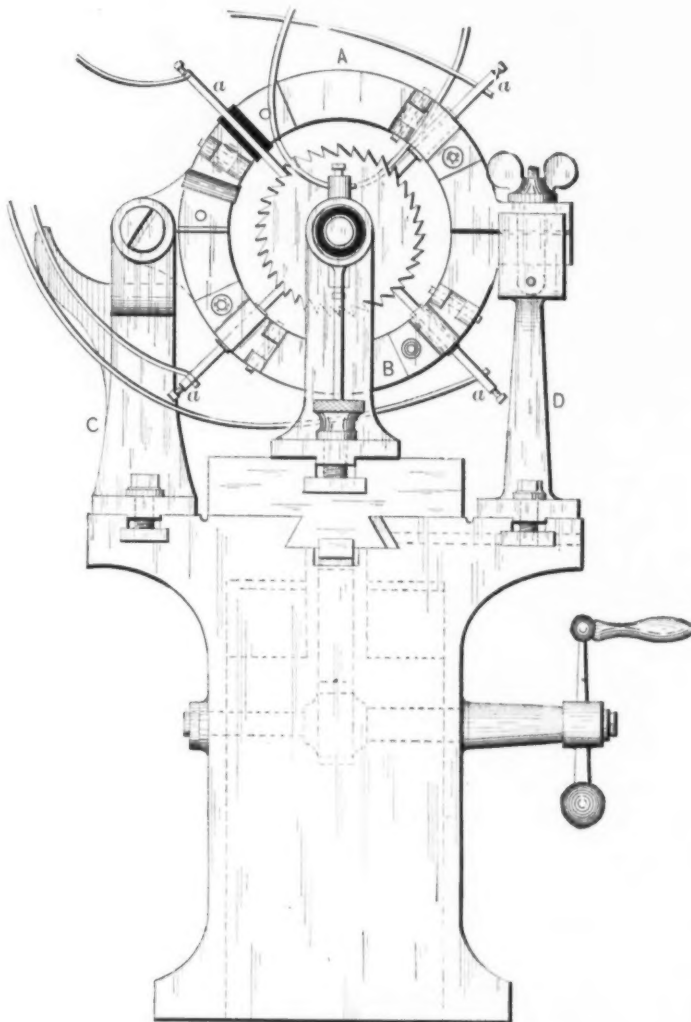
End Elevation of Electrical Heating Apparatus.
